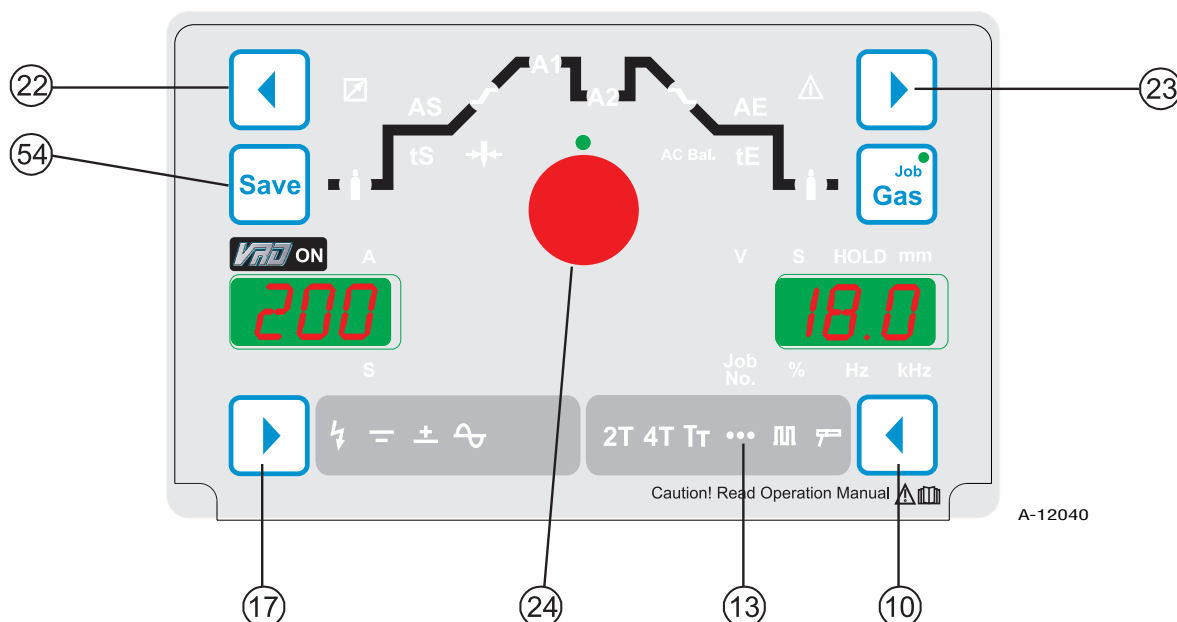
GTAW Spot Welding Mode with DWELL Time
